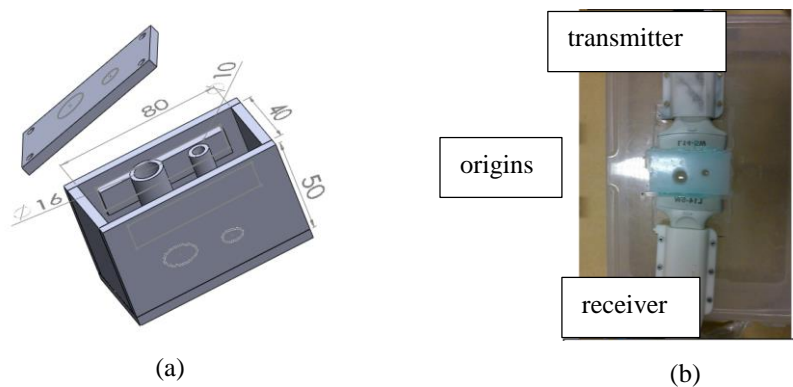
Experimental setup: (a) The phantom mold CAD model. The mold was made using laser cut acrylic pieces. (b) the phantom is placed between two ultrasound probes that are aligned with millimeter range inaccuracy.
